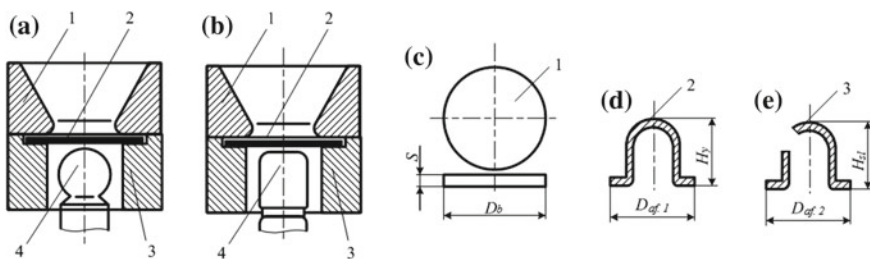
Schemes of drawing of sheet material: a a spherical punch; b a cylindrical punch; c, d, e formation stages of the cap to the rupture from the sheet material; 1—clamp; 2—billet; 3—matrix; 4—punch
